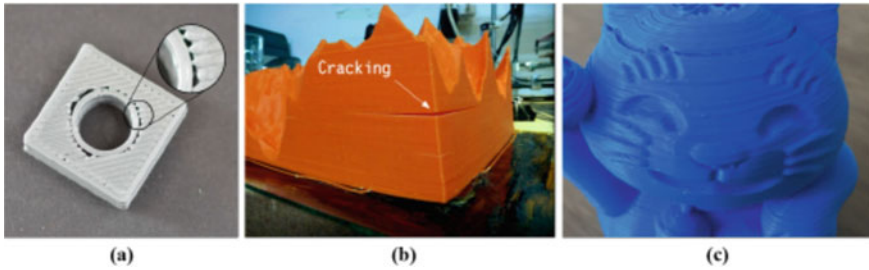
a Surface defect crack. b Shell defect crack. c Delamination [20]
